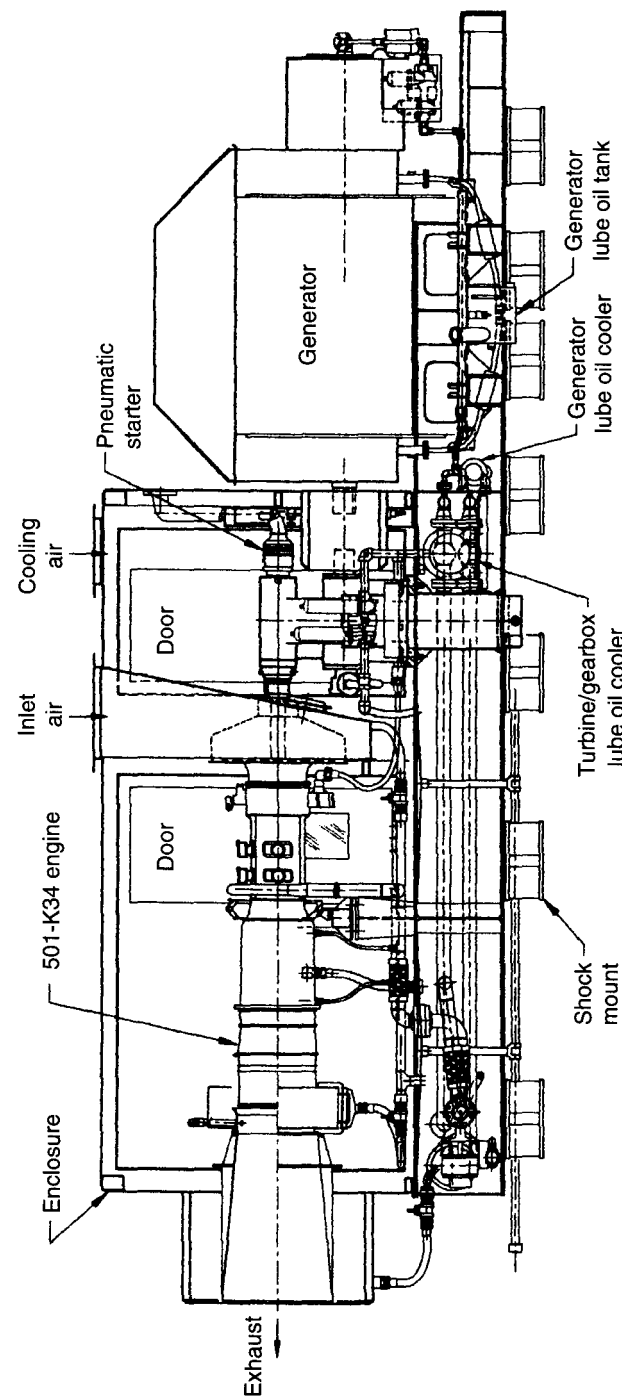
Allison model AG 9140 ship service gas turbine generator set. Courtesy Allison Engine Company.
